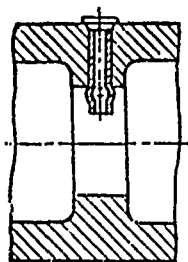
Strengthening a Shaft at the Point of Hole Location
